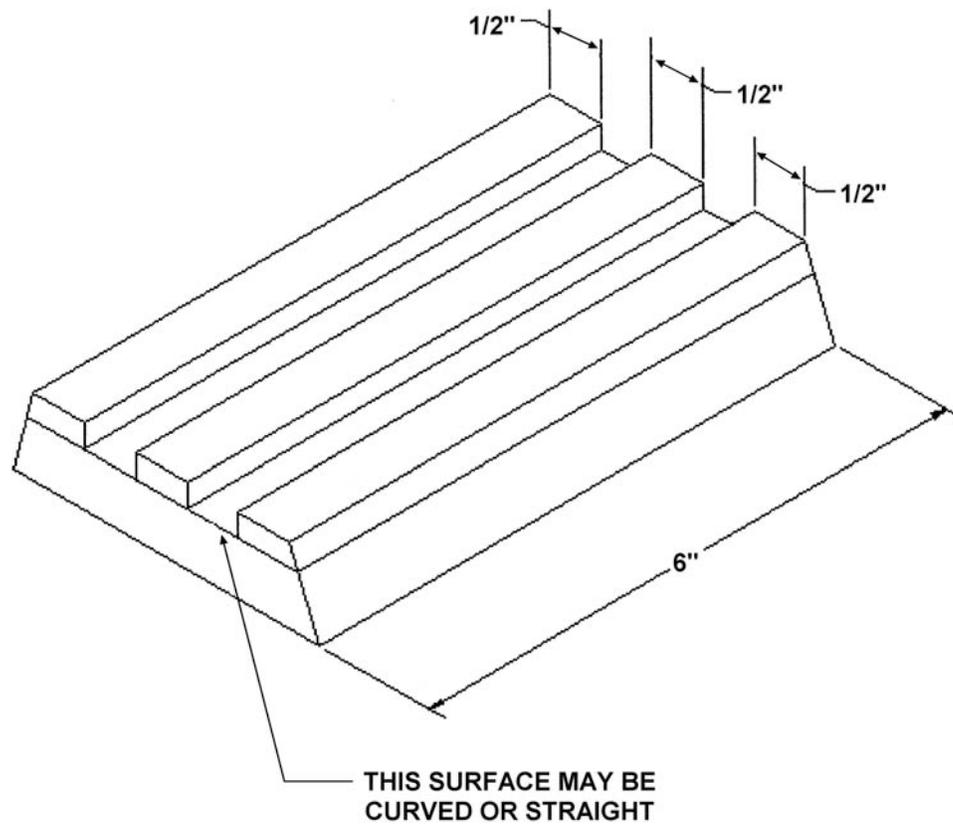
Test specimen for adhesion testing class III stave bearing.
